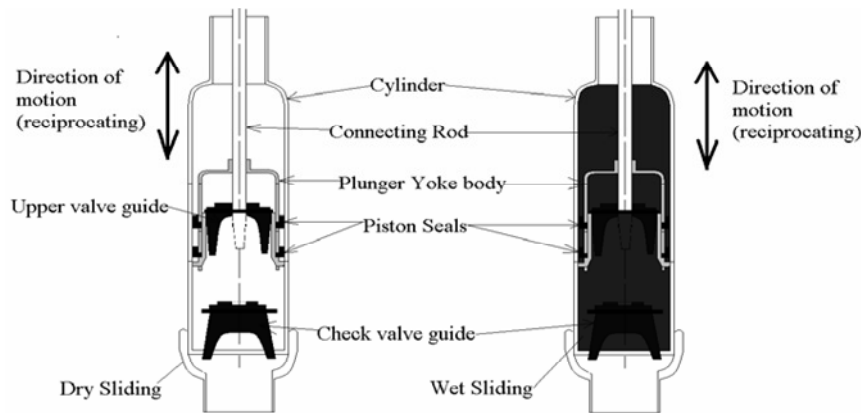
Schematic of dry sliding and wet sliding in the cylinder assembly
